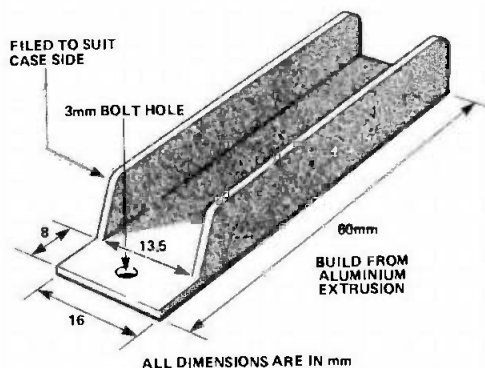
Details for the aluminium extrusion that houses the photoprobe.
